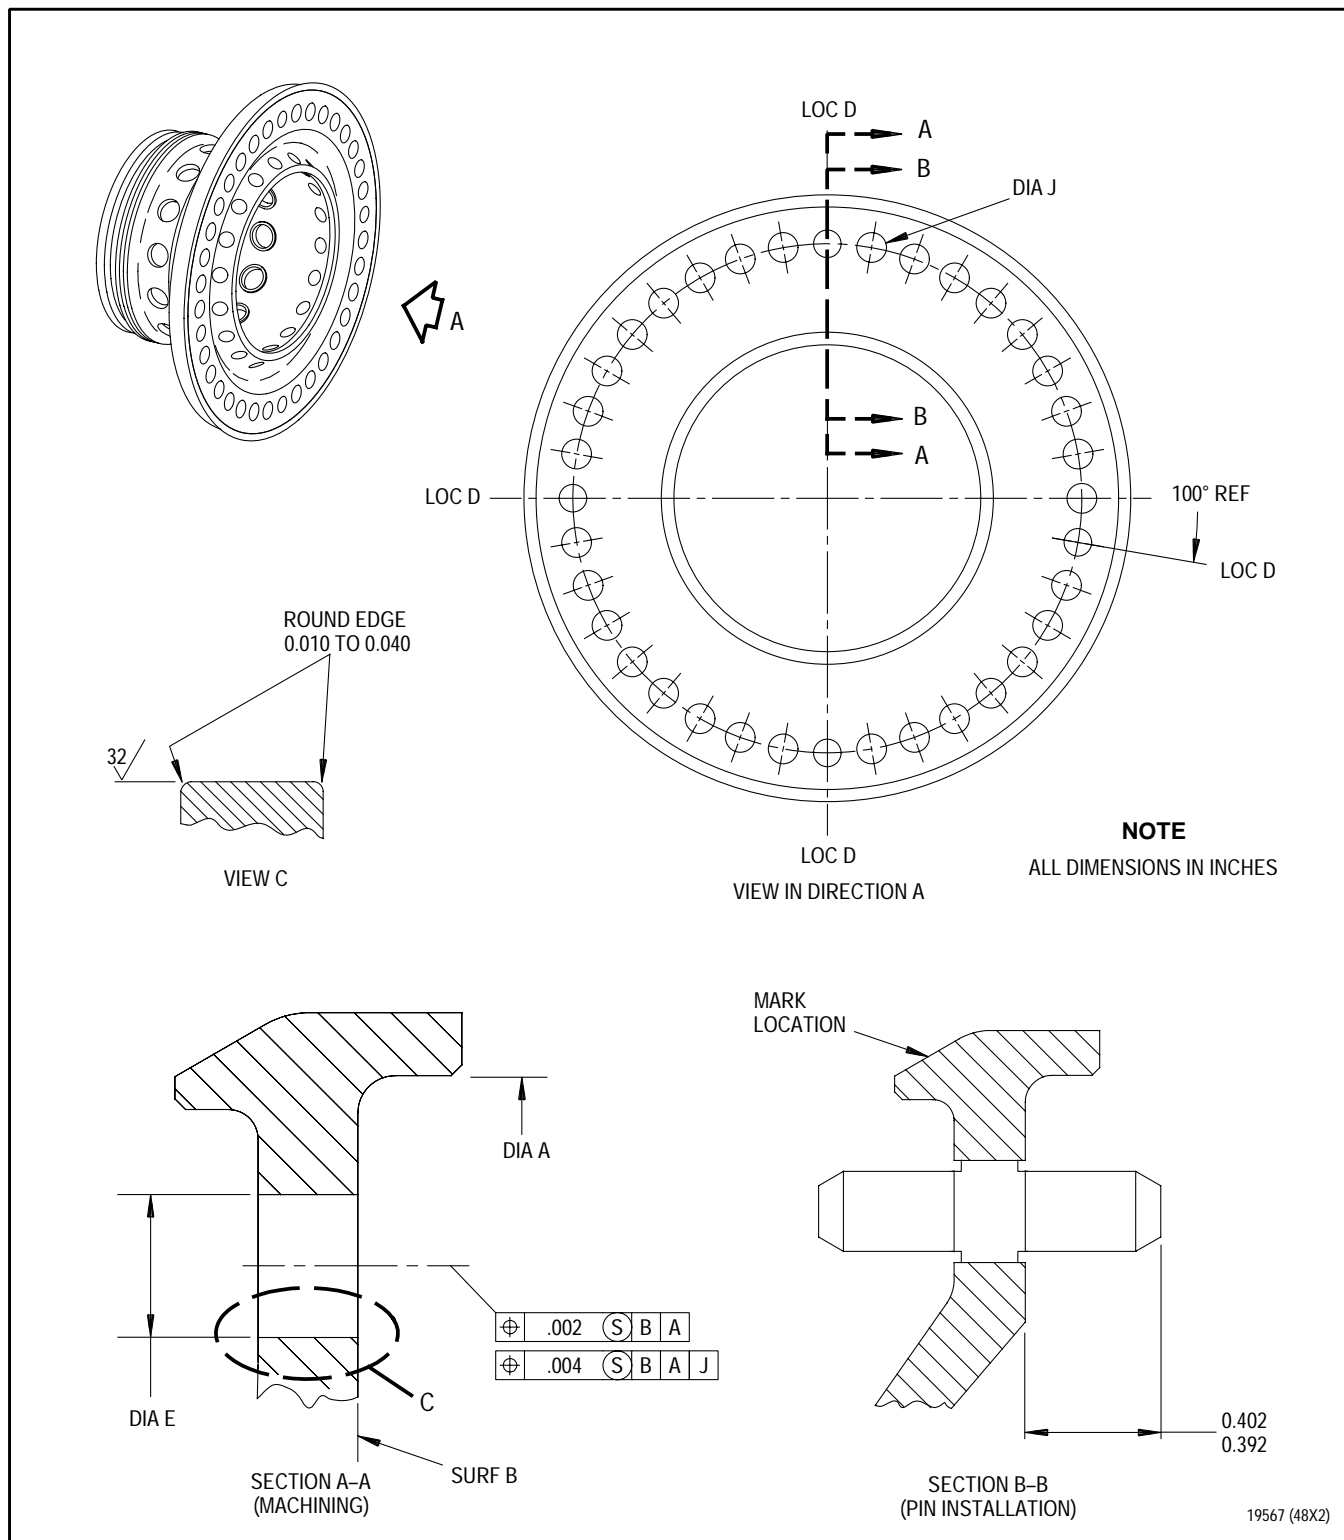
Front Turbine Hub Assembly - Repair of Worn Dowel Pin Holes.
